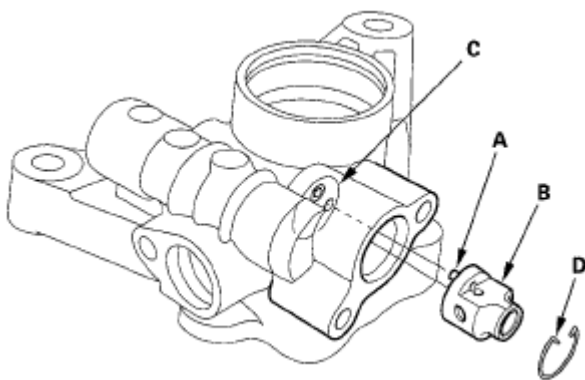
Identifying Pin Of Subvalve With Oil Passage In Pump Housing
